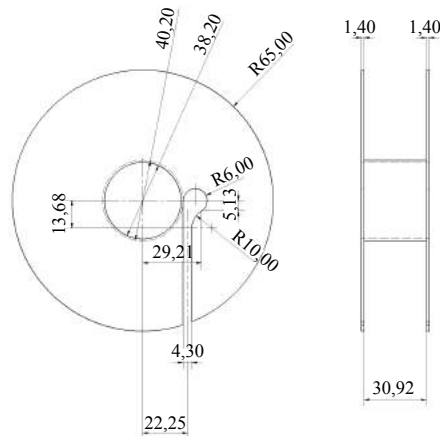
A technical drawing for a typical coil former used in the slower. Dimensions are quoted in mm.
